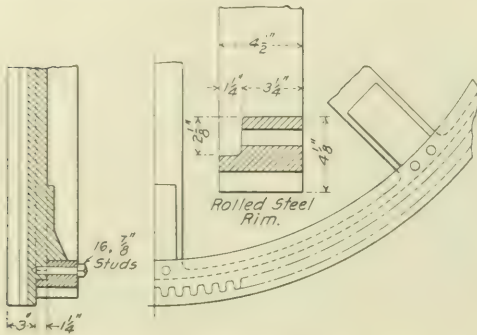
Details of Driving Wheel Lathe Face Plate and Steel Gear Rim.
